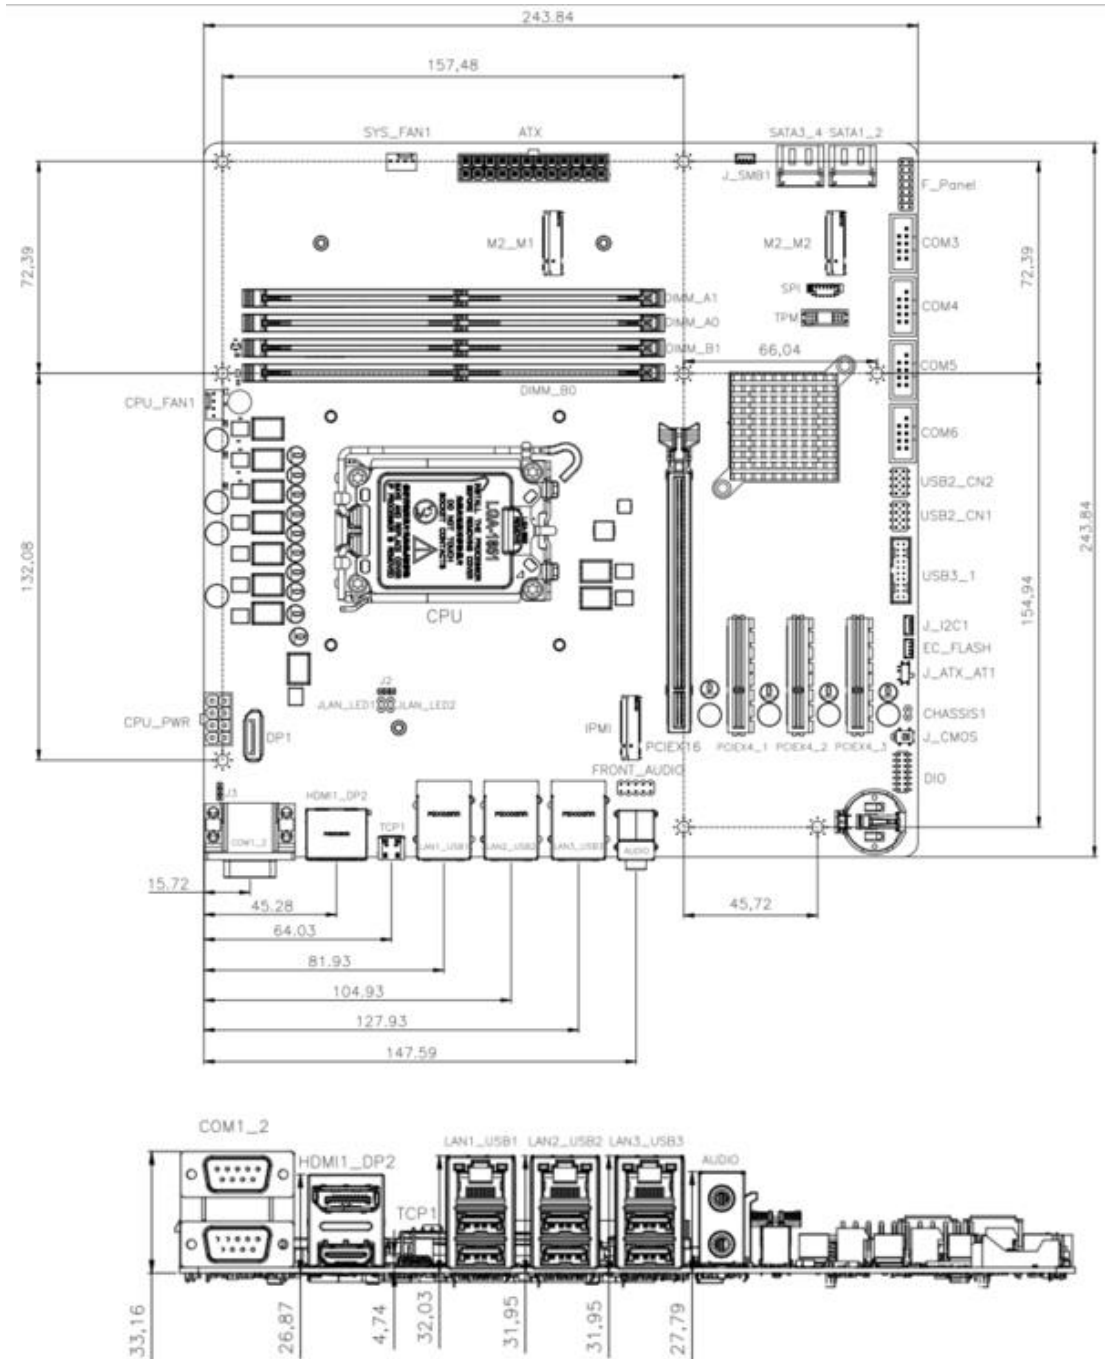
IMB-ARL-Q870 Dimensions (mm)
